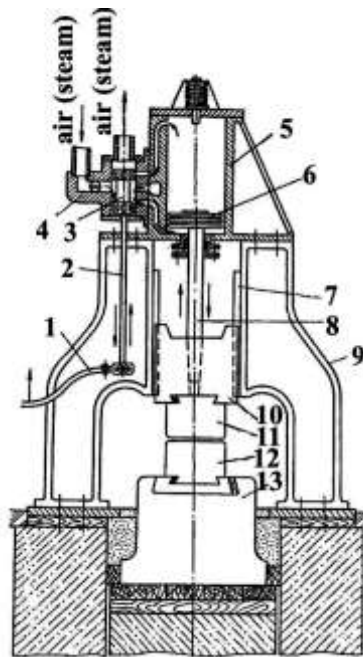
Forging hammer: 1 – handle; 2 – traction; 3 – valve; 4 – hole (pipe); 5 – cylinder; 6 – piston; 7 – sliding surface; 8 – rod; 9 – body; 10 – slider; 11 – block head; 12 – smithy; 13 – anvil block
